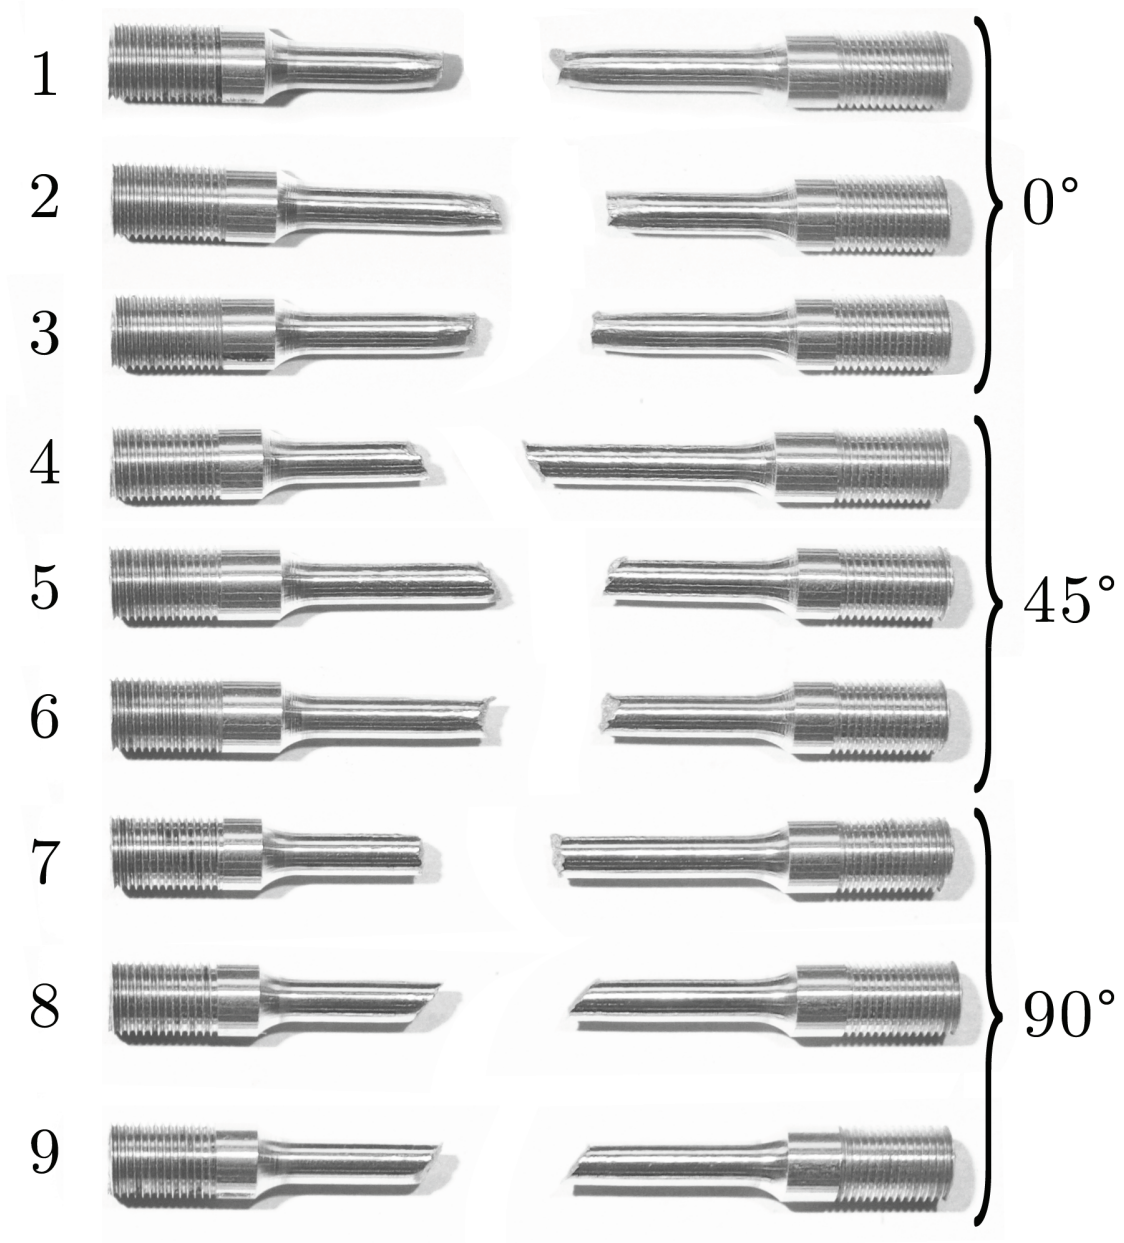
Tensile specimens post fracture for all AA6070-T6 tests.
